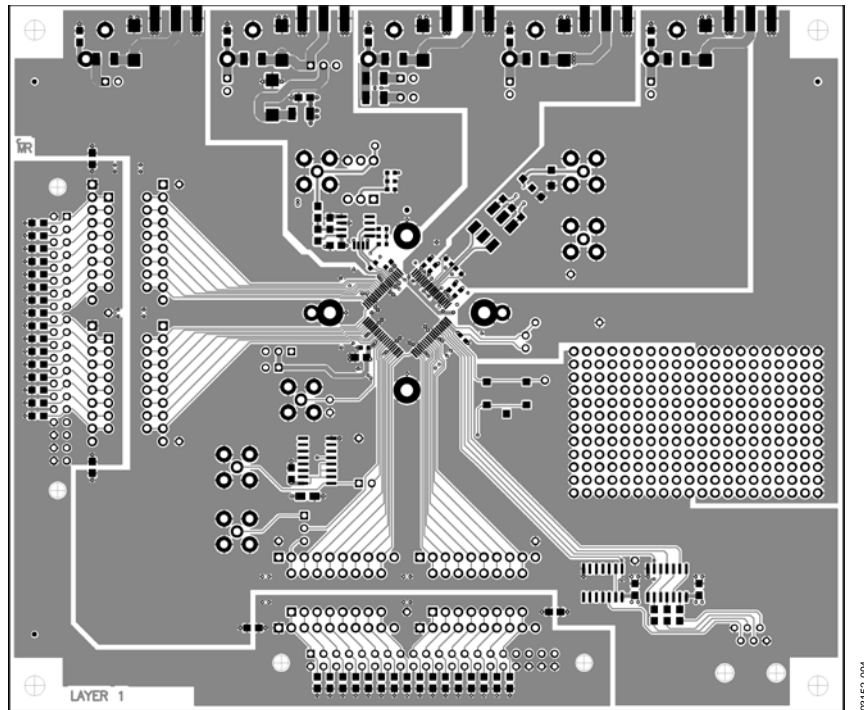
PCB Assembly, Layer 1 Metal, Rev. F Evaluation Board
